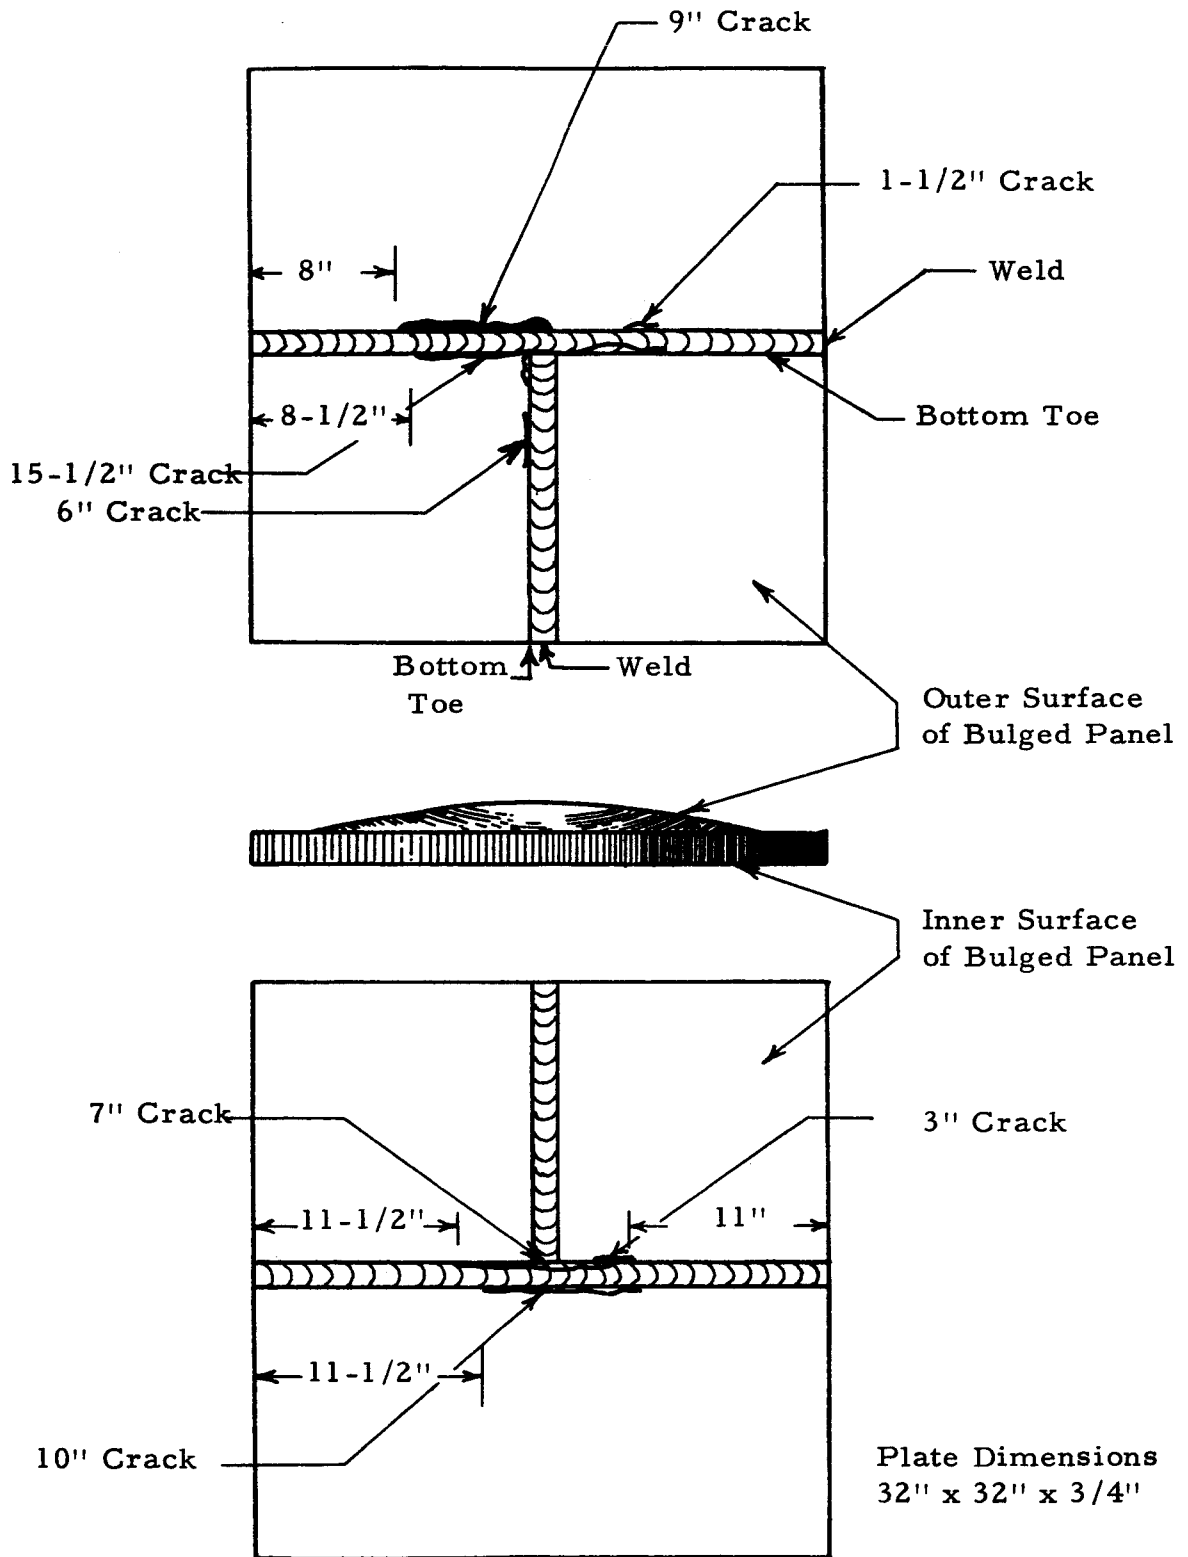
LOCATION AND MEASUREMENTS OF SURFACE CRACKS IN "TEE" WELD (PANEL NO. 42) AFTER HYDRAULIC BULGE TEST
